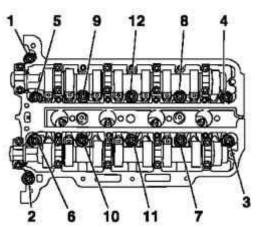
Order otvorachivaniya bolts fastening the cylinder head
